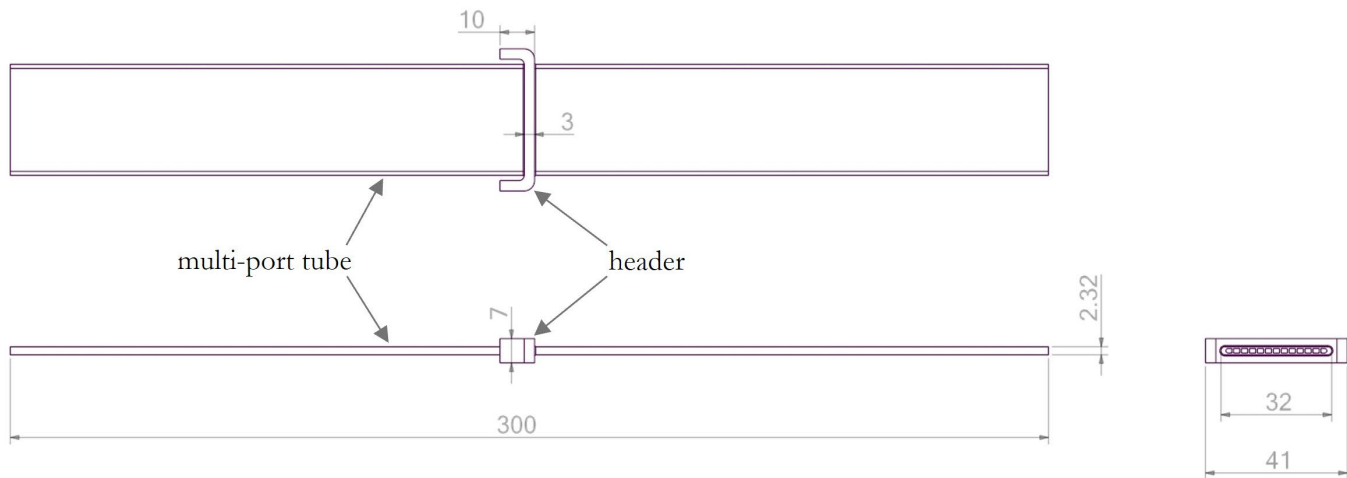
Fatigue specimen geometry (dimensions in millimetres).
